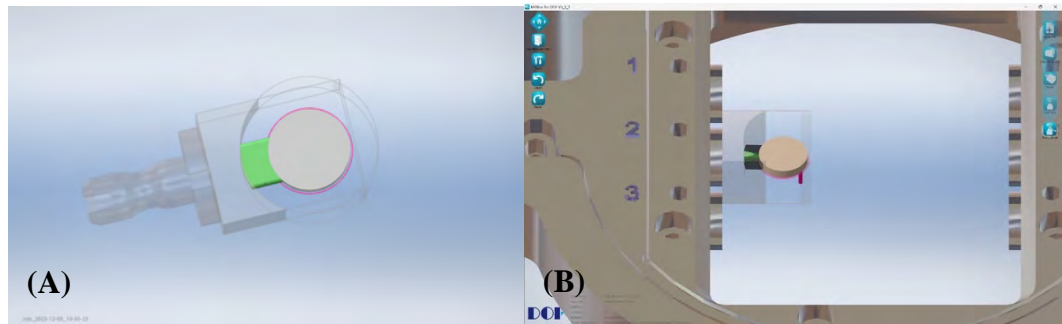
(A) Blender software to design disc-shaped specimen; (B) Millbox software to position the disc for milling
